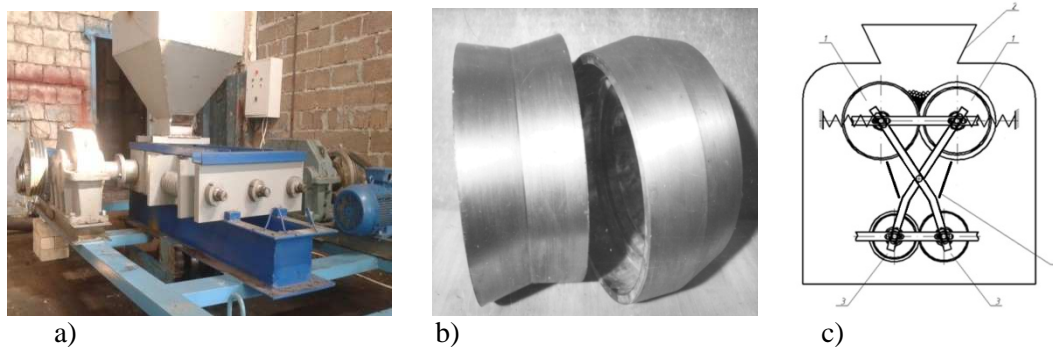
A press roller grinder with a device for disaggregation materials: a) general view, b) view of installation in the line, c) scheme
